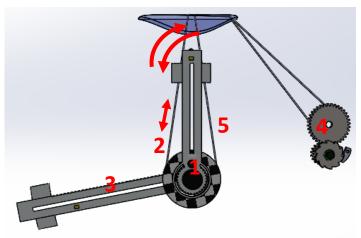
Magnetic pin locker deactivated: elbow flexion/extension motion enabled 1- Magnetic pin locker, 2- Upper-arm orthosis part, 3- Forearm orthosis part, 4- Gear 1, 5- Cable
